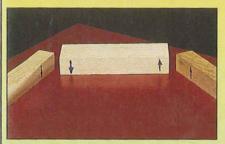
Photo A: Dry-assemble frames, then mark a common face at each joint. To slot parts, lay them common face down.
